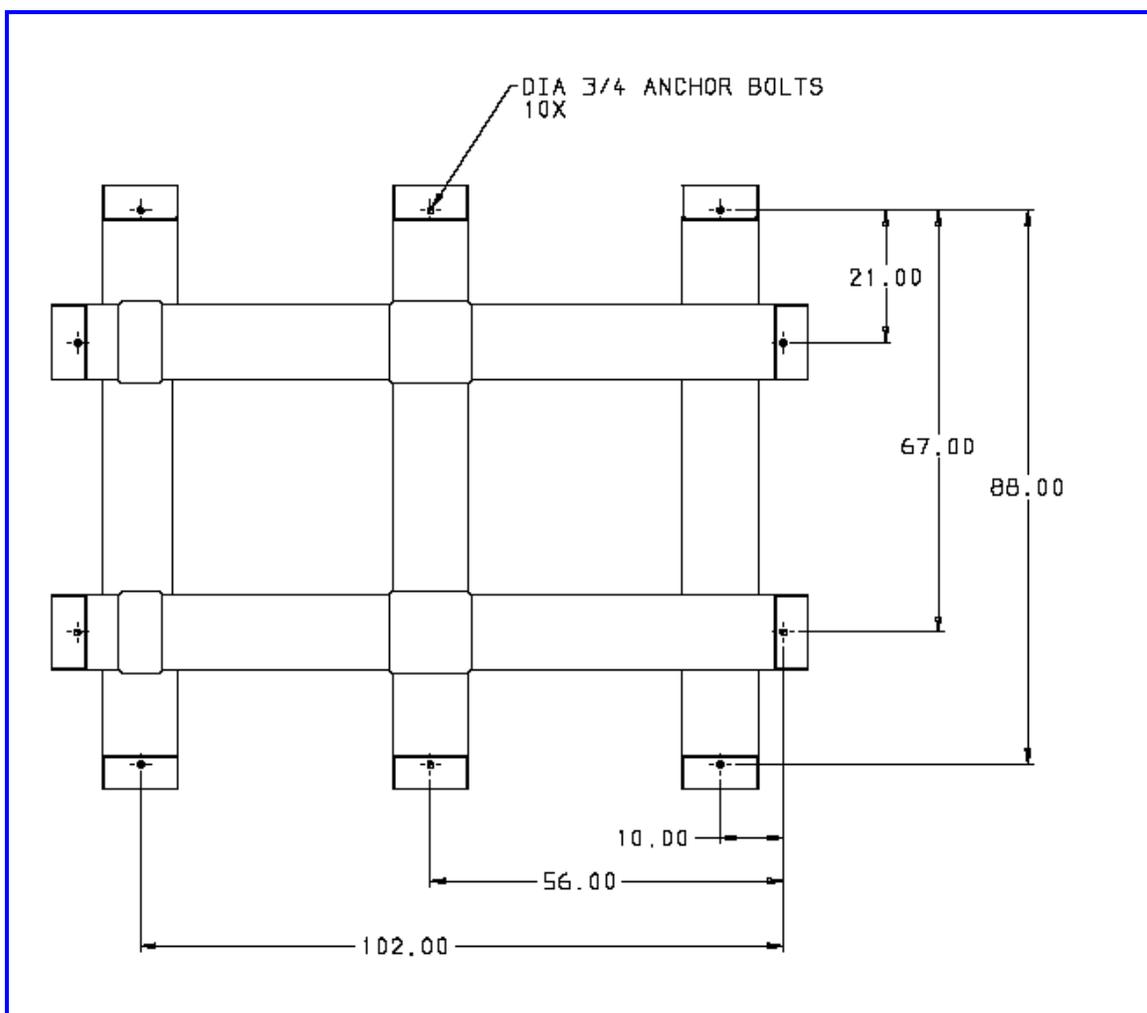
Anchor Bolt Hole Pattern for Breakover Fixture (dimensions in inches)
